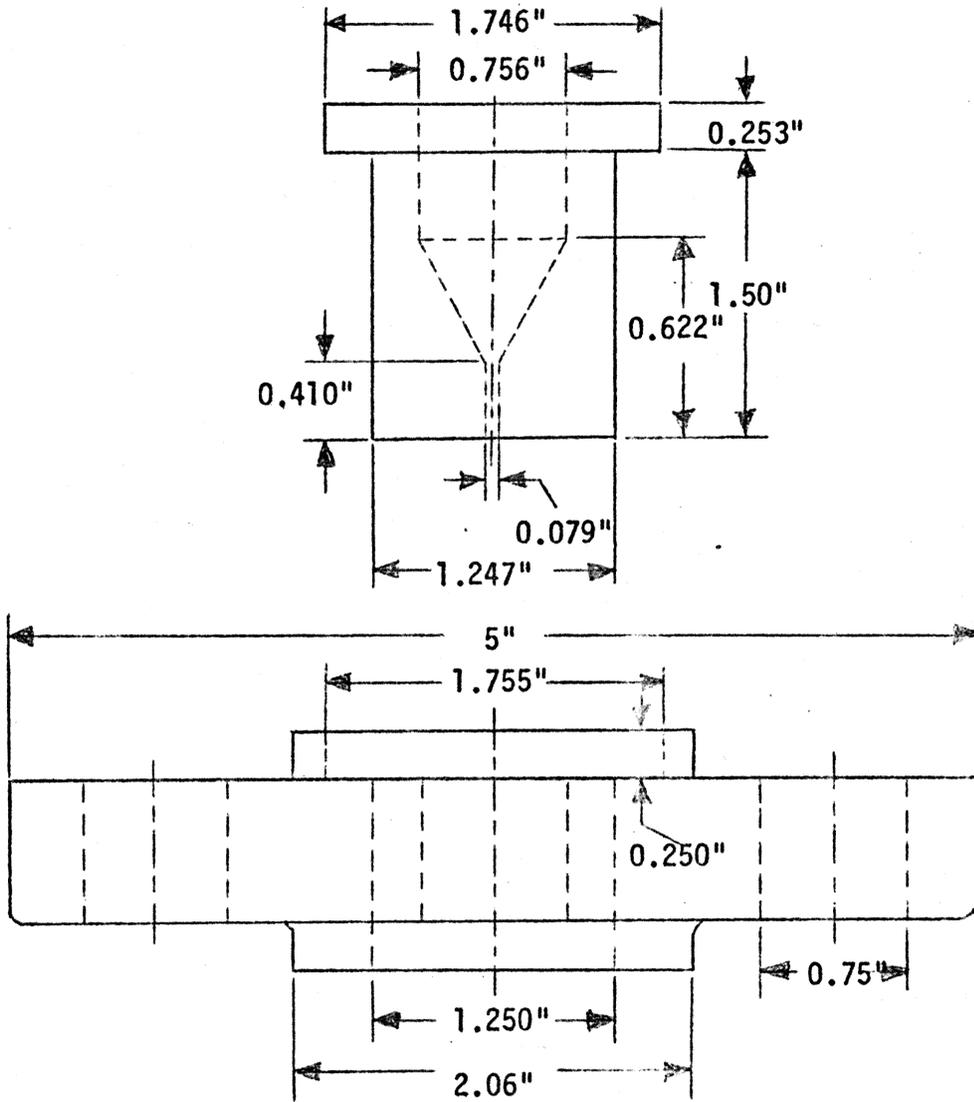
Actual Size Drawings of Spinneret and Assembly Flange
